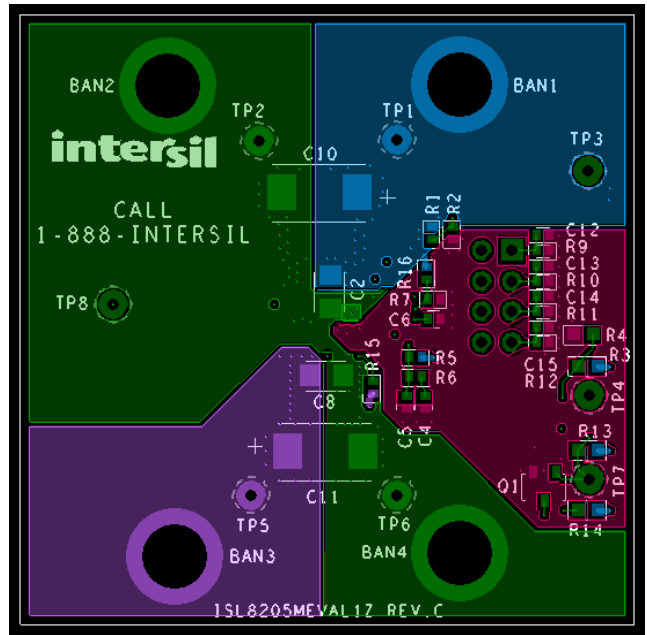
BOTTOM LAYER (BOTTOM VIEW)
